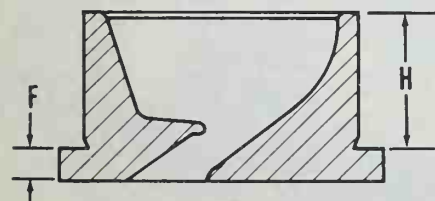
Turbulence chamber flange thickness (F) is 3.975-4.025 mm while height (H) is 18.50-18.80 mm.
